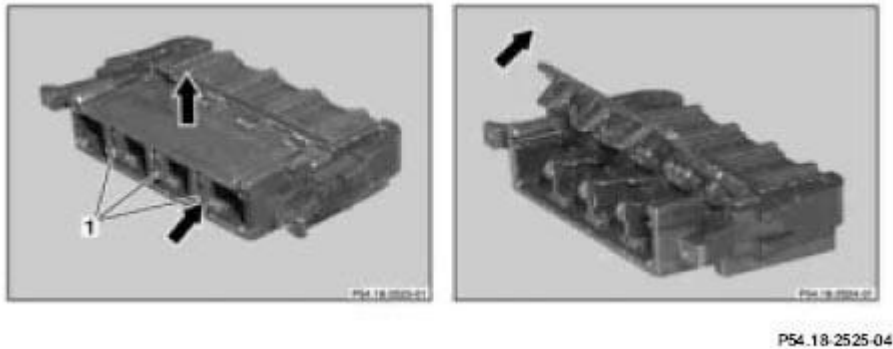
Opening Tab - Shown On A 4-Pin SPT Coupling
